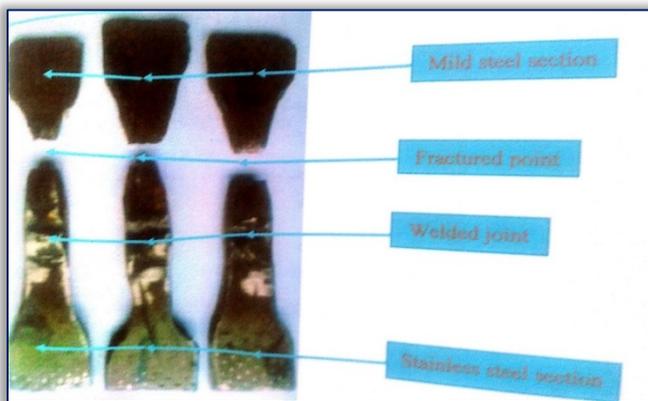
Fractured sample after tensile test showing fracture of sample at mild steel side
